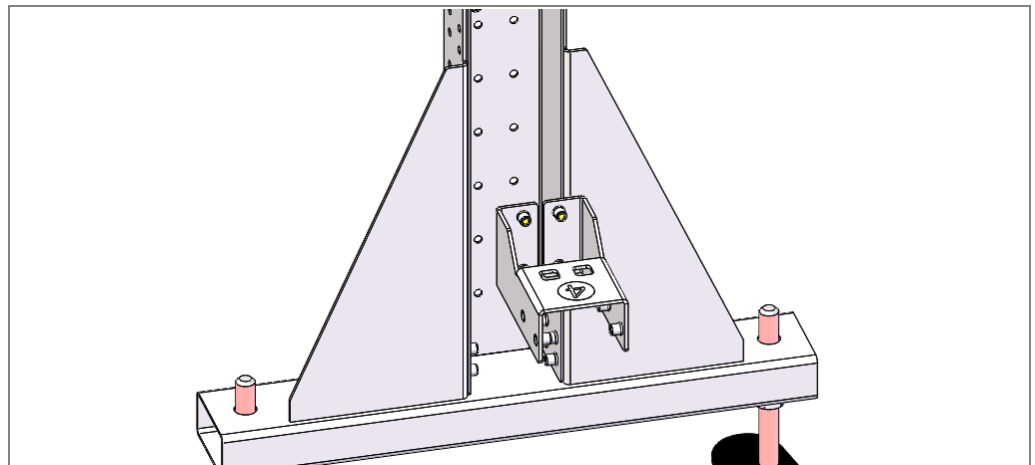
Steel frame: mounting the bracket for horizontal bars
